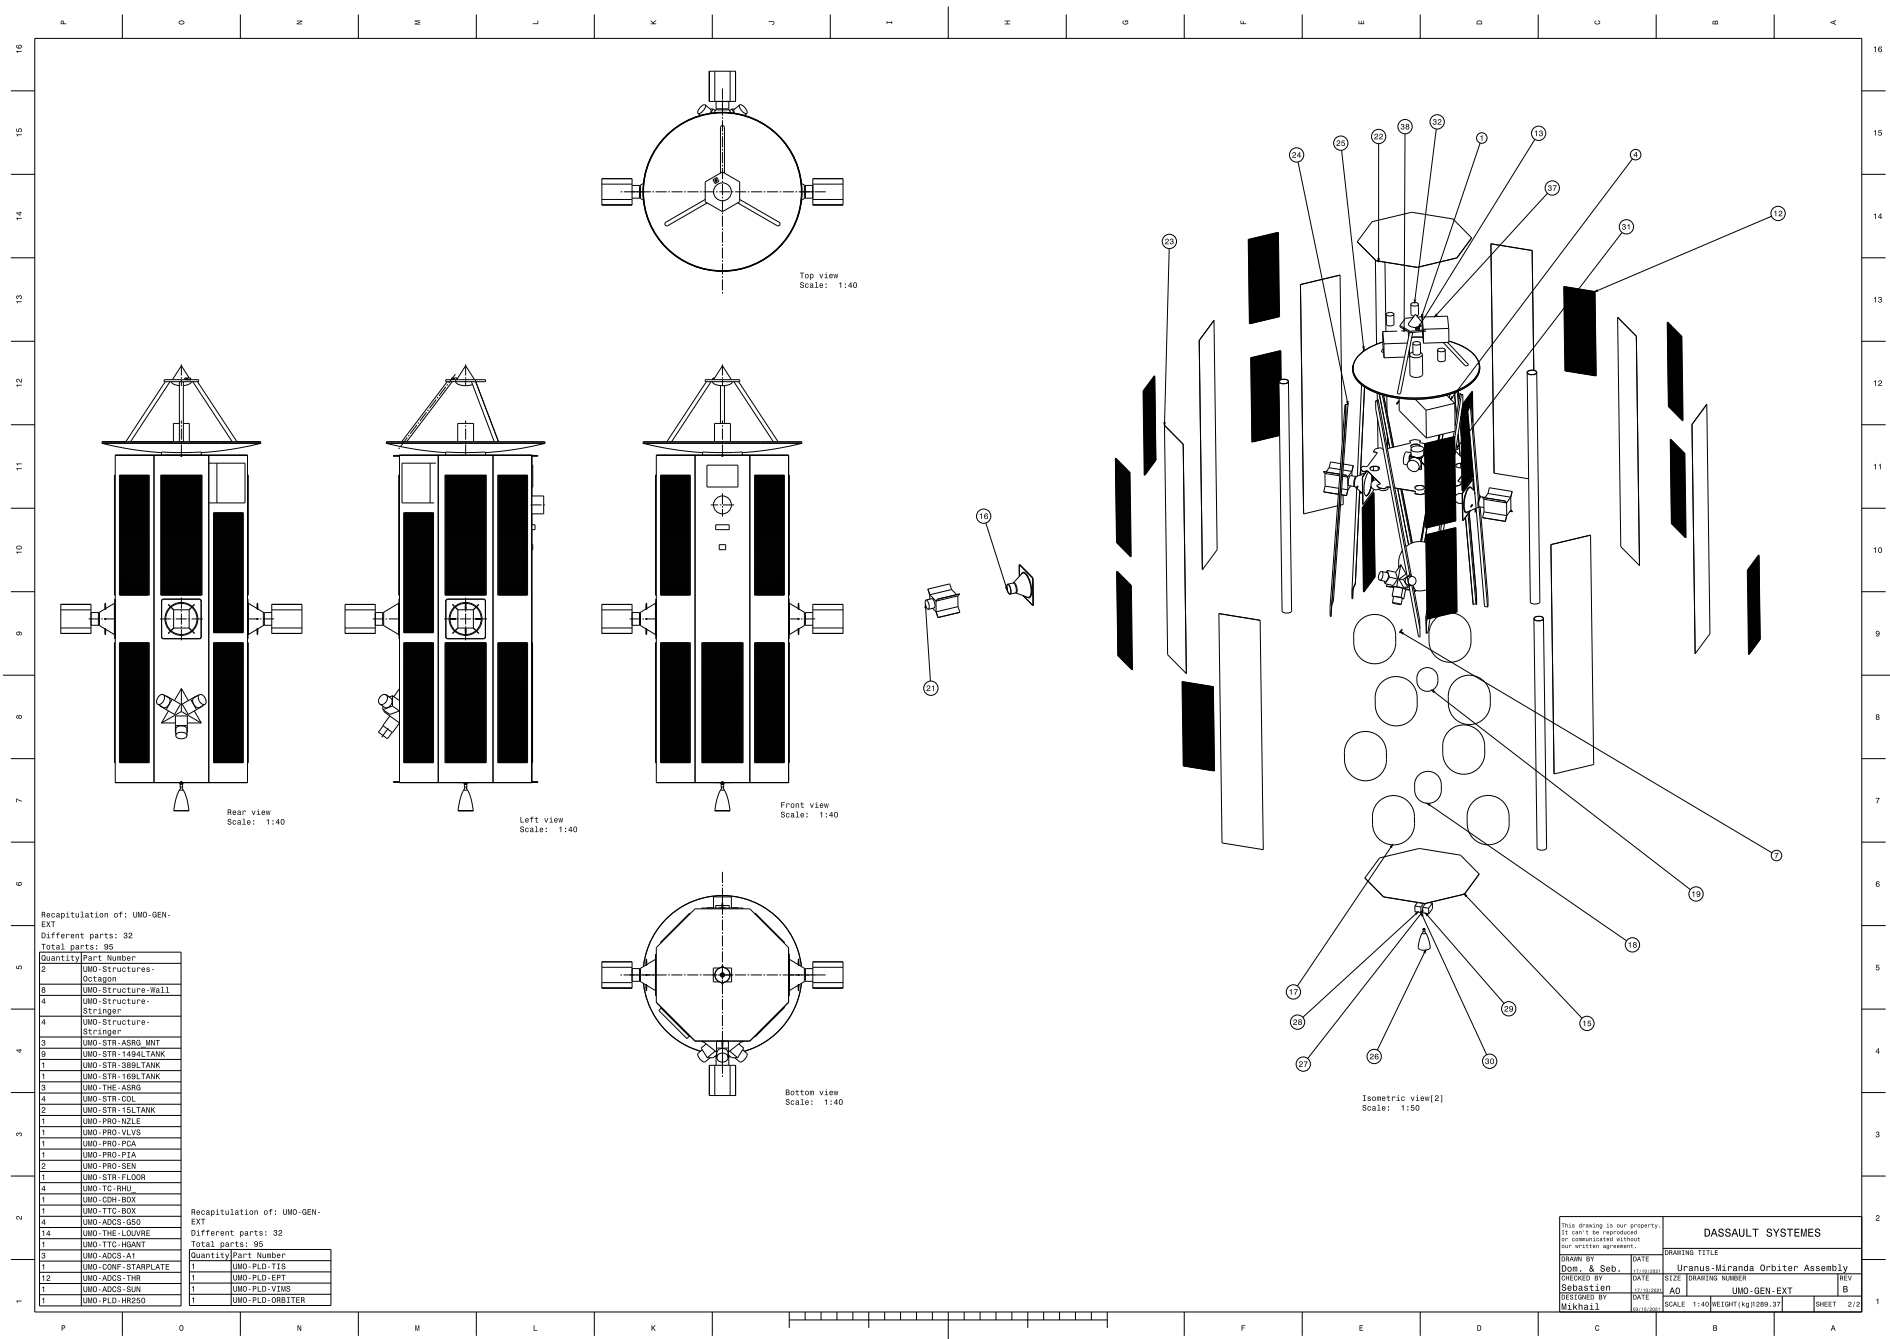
3 view projection and exploded view of the general layout of the Uranus Miranda Orbiter
